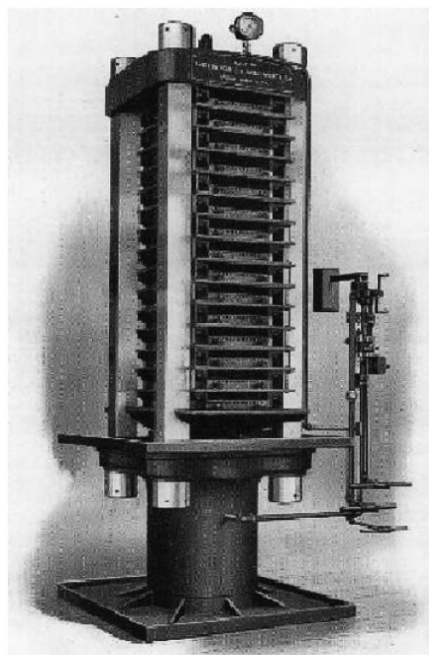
Hydraulic press. Courtesy of French Oil Mill Machinery Company.
